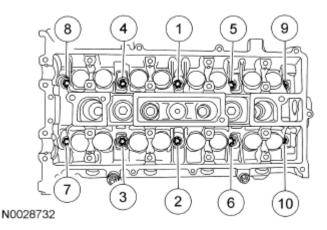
Identifying Tightening Sequence Cylinder Head Bolts Courtesy of FORD MOTOR CO.
